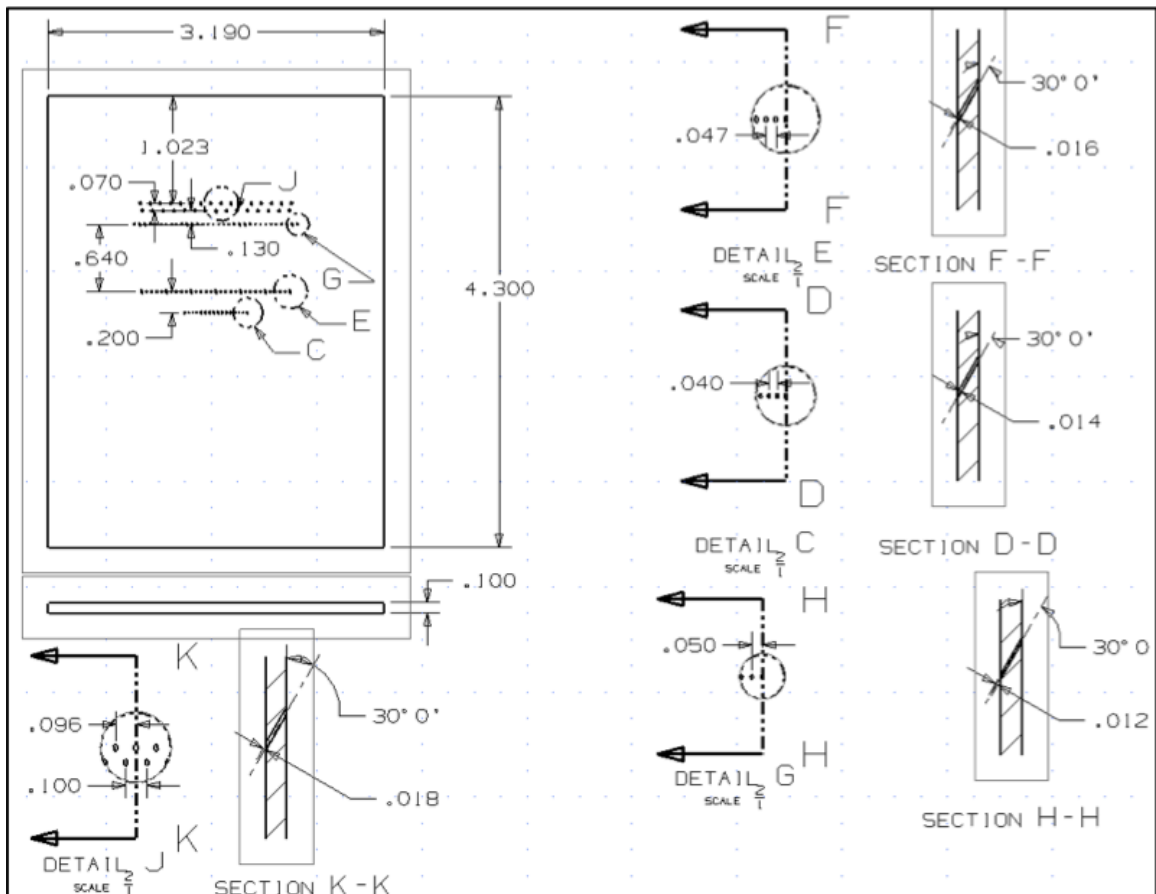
Print of Flat Plate and Hole Pattern – Units in Inches [1]
